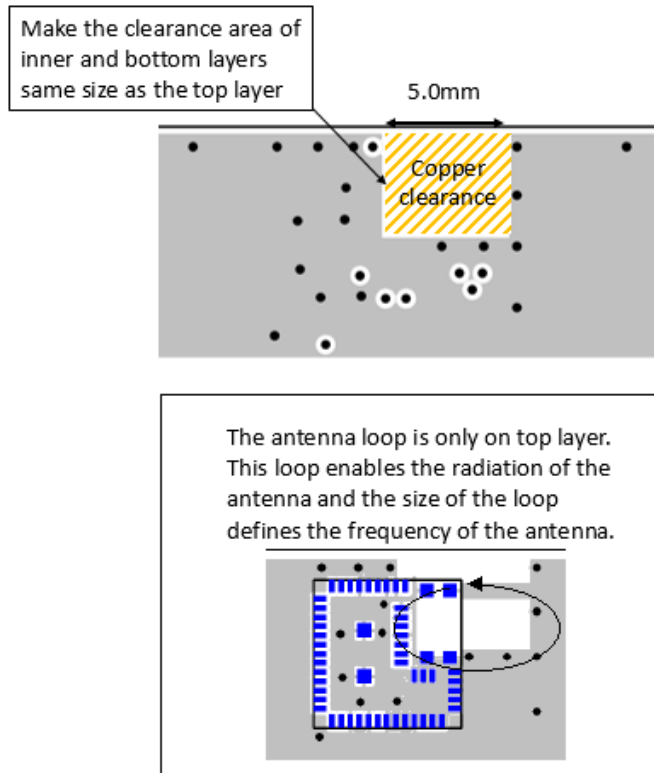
BGM121/BGM123 PCB Middle and Bottom Layer Design
